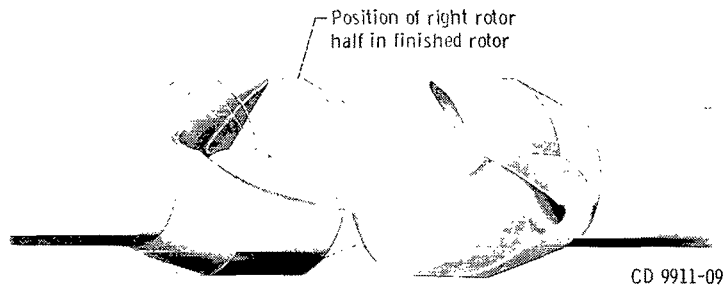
Exploded view of magnetic rotor parts of four-pole Lundell alternator.
